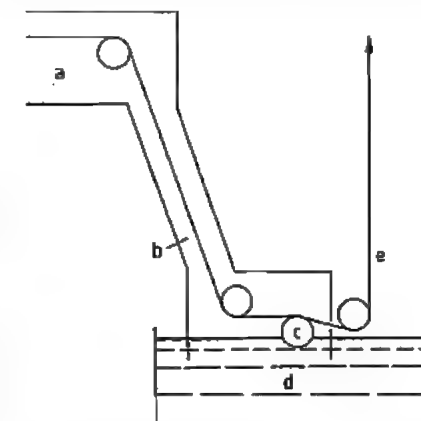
Coating steel strip on one side only (Nippon Steel): a) Furnace; b) N₂ atmosphere; c) Coating roller; d) Zinc bath; e) Stripping nozzle.
